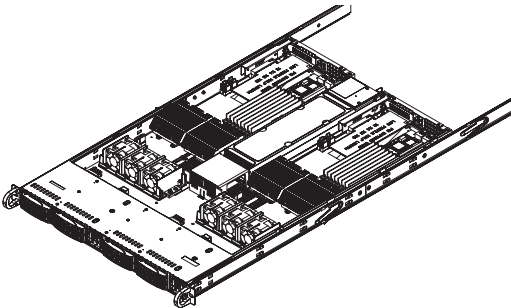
Inner Rails and Inner Rail Extension Installed
